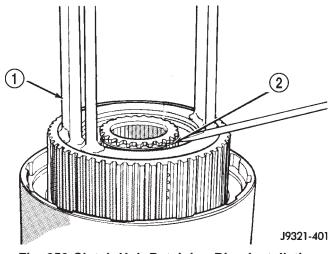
Clutch Hub Retaining Ring Installation 1 – SPECIAL TOOL 6227–1 2 – CLUTCH HUB RETAINING RING
